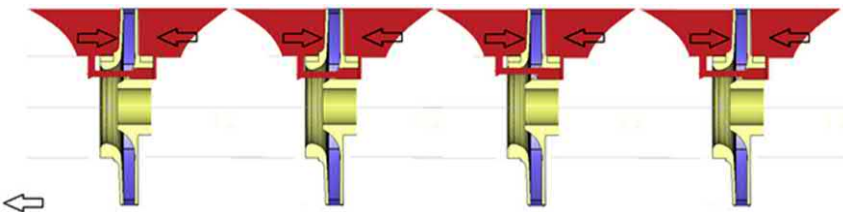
Here a stacked multistage rotor consisting of impellers with back AND front wear rings is shown. Again the residual thrusts are multiplied. But the total is much less than with the unbalanced impeller shown above.
